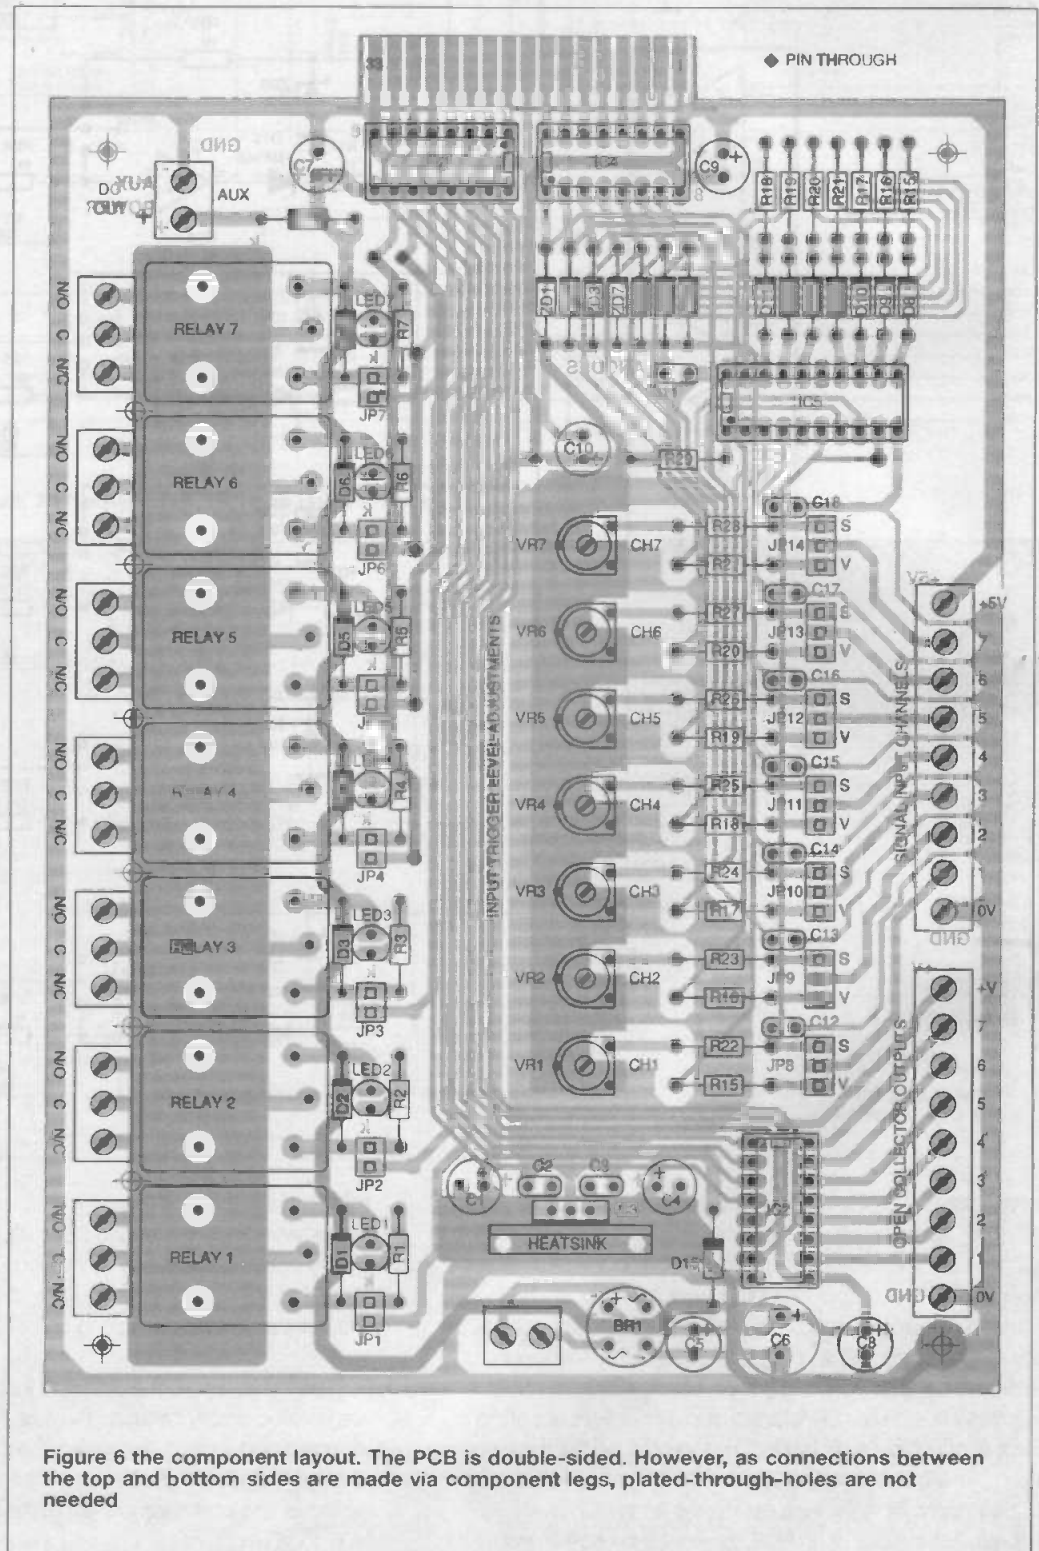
the component layout. The PCB is double-sided. However, as connections between the top and bottom sides are made via component legs, plated-through-holes are not needed
